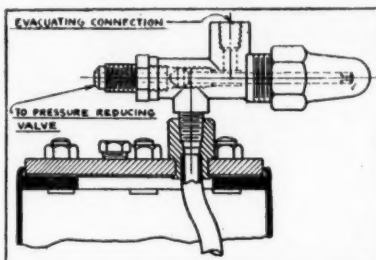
How to mount a gauge connection on top of a high side float valve.
